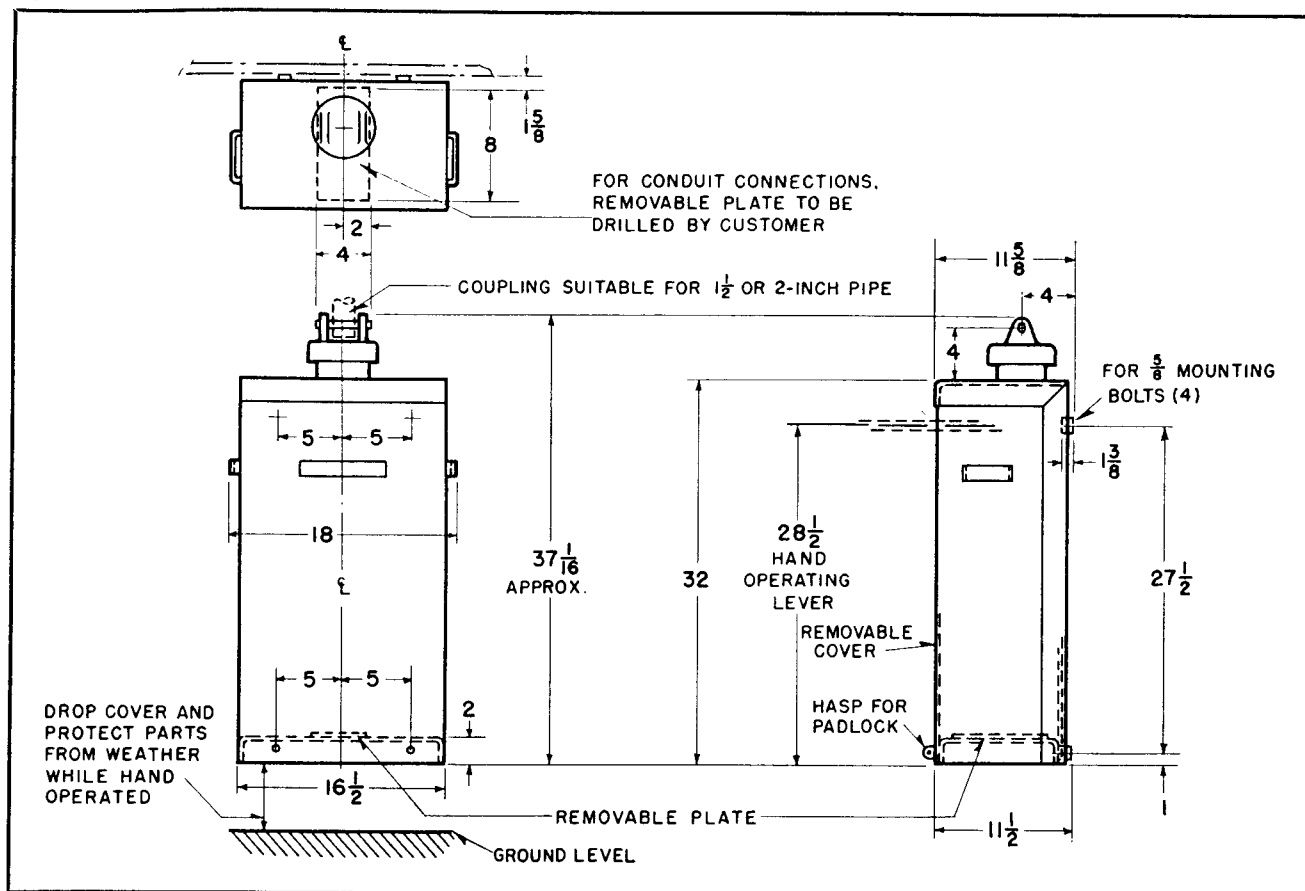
Outline Dimensions in Inches (Approximate Only—Do Not Use for Construction Purposes)
